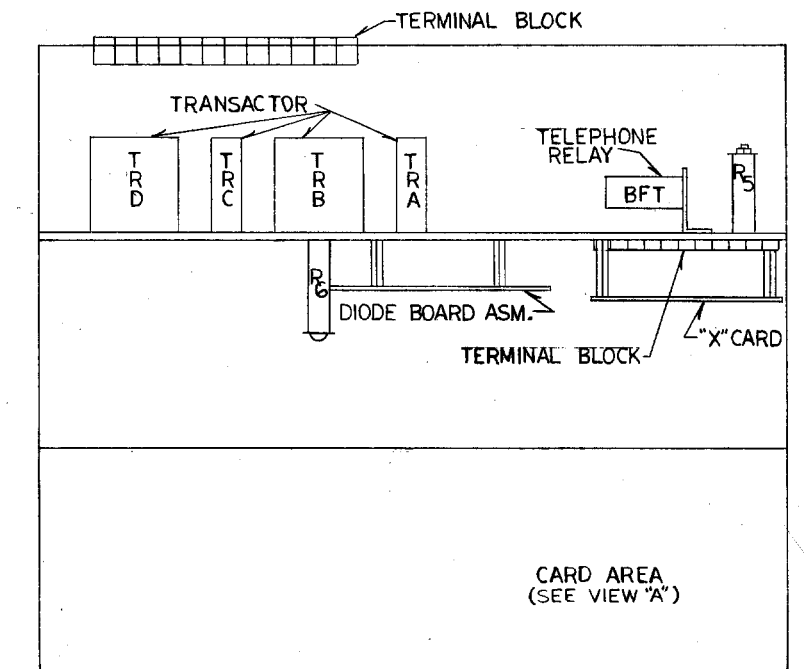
(0257A5723-0) OUTLINE AND MOUNTING DIMENSIONS LOGIC AND TAP BLOCK WITH TEST PANEL
